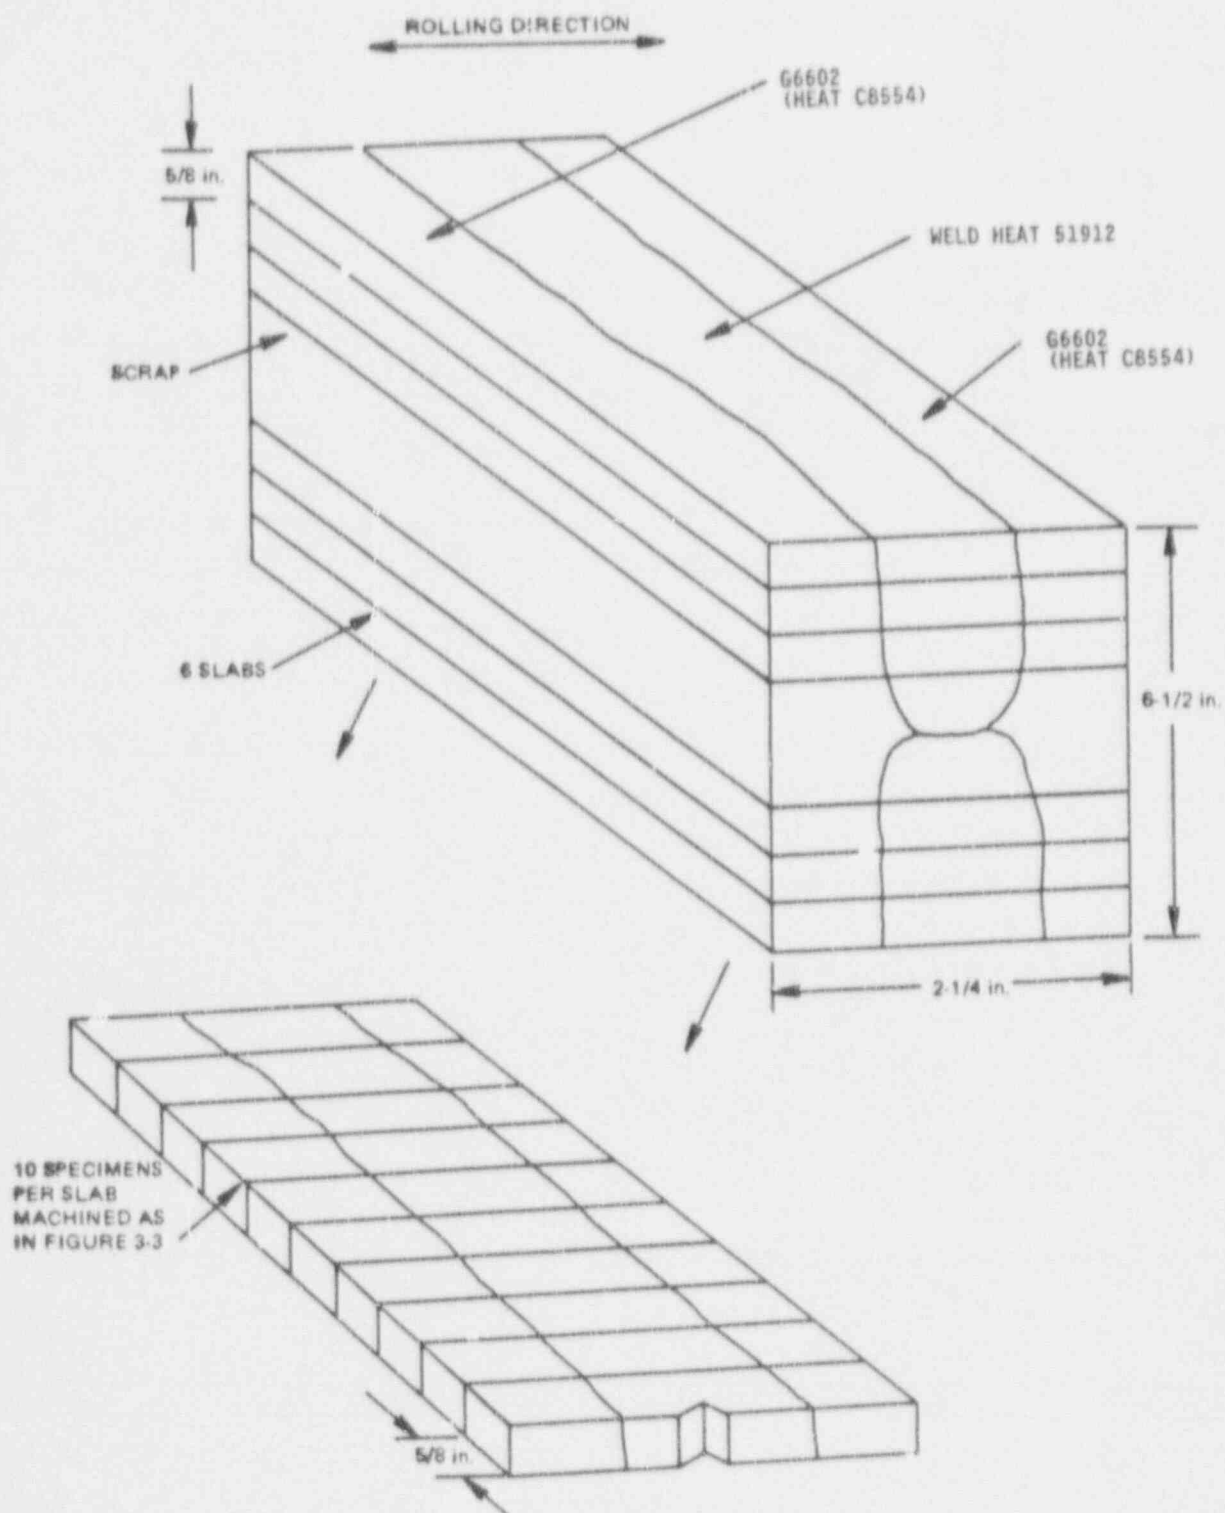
Fabrication Method for Weld Metal Charpy Specimens
